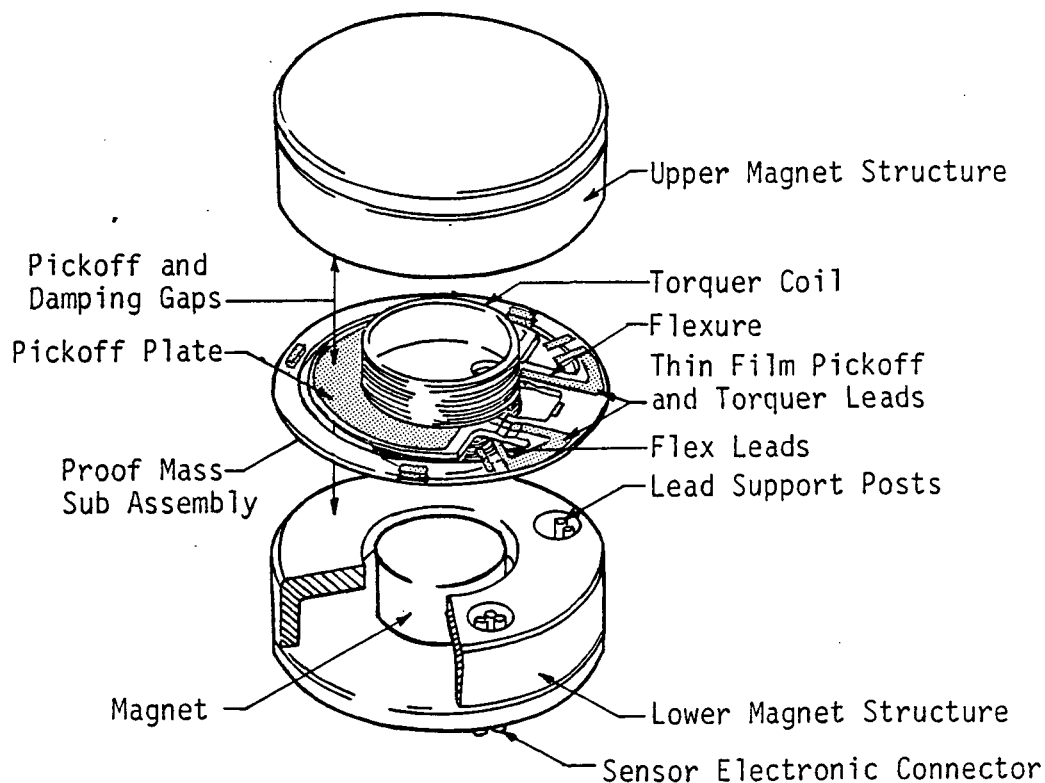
EXPLODED VIEW OF SUNDSTRAND MODEL QA1100-AA01-2 ACCELEROMETER
